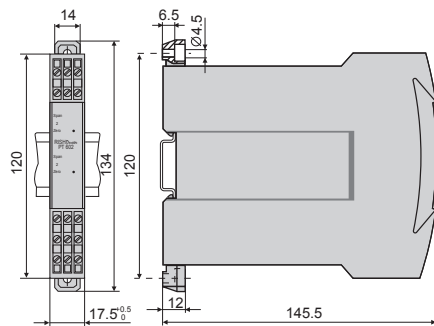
in housing S17 screw hole mounting brackets pulled out.
